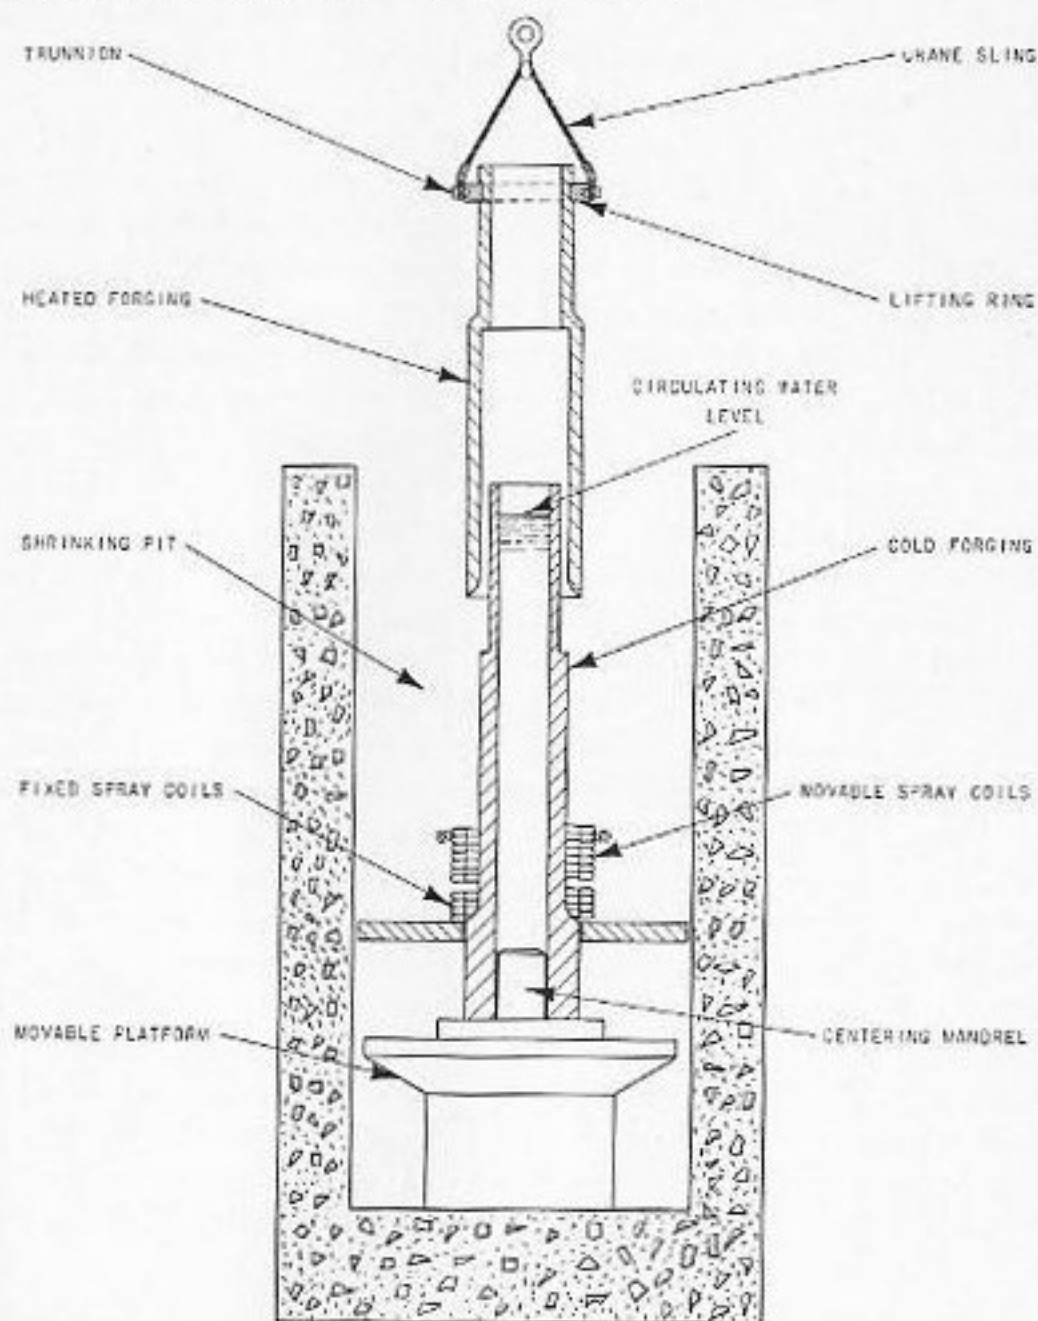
SHRINKAGE PIT—SHOWING HEATED FORGING SUSPENDED AND READY FOR ASSEMBLY.
